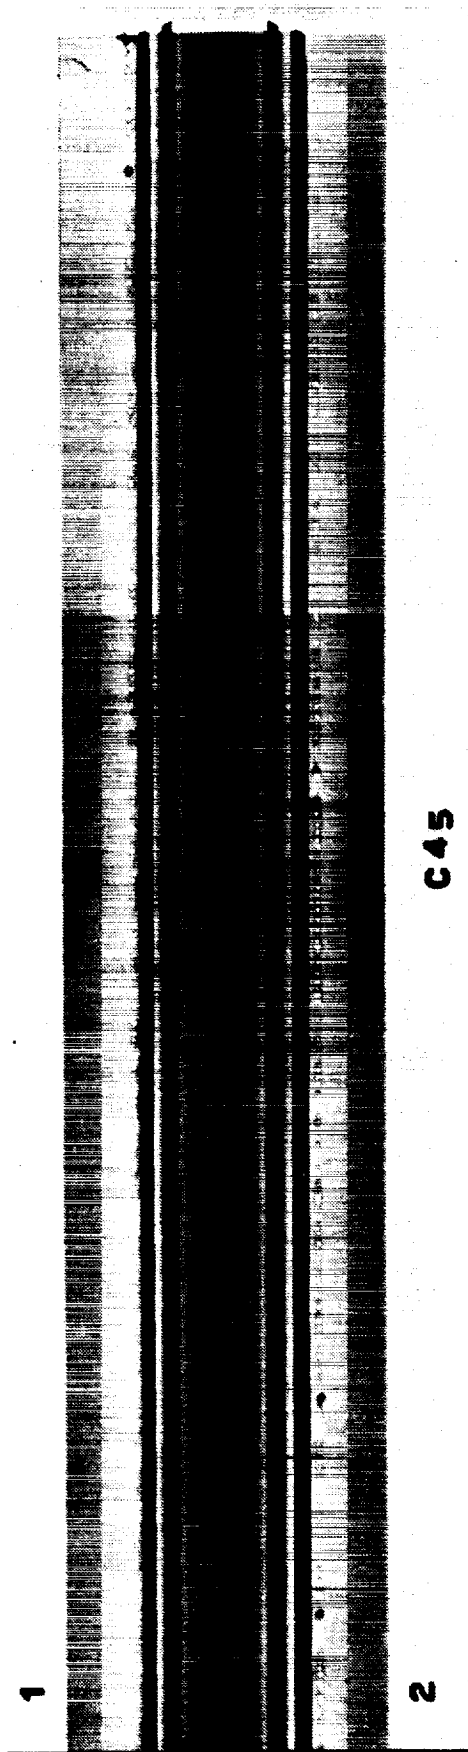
Contact Prints of Radiographs Showing Porosity in 2095-T6 to 2095-T8 Welds on Prototype Parts That were Chemically Milled 0.005 in. (0.13 mm) Prior to Welding.
